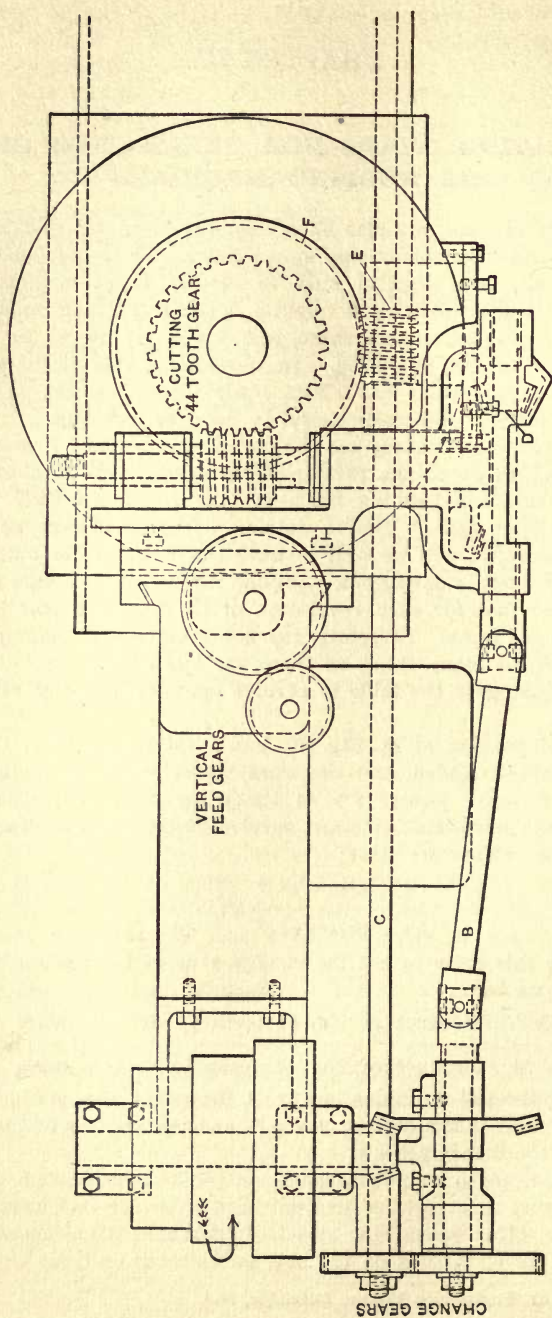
Hob and Table Driving Arrangement of a No. 3 Farwell Gear-hobbing Machine
